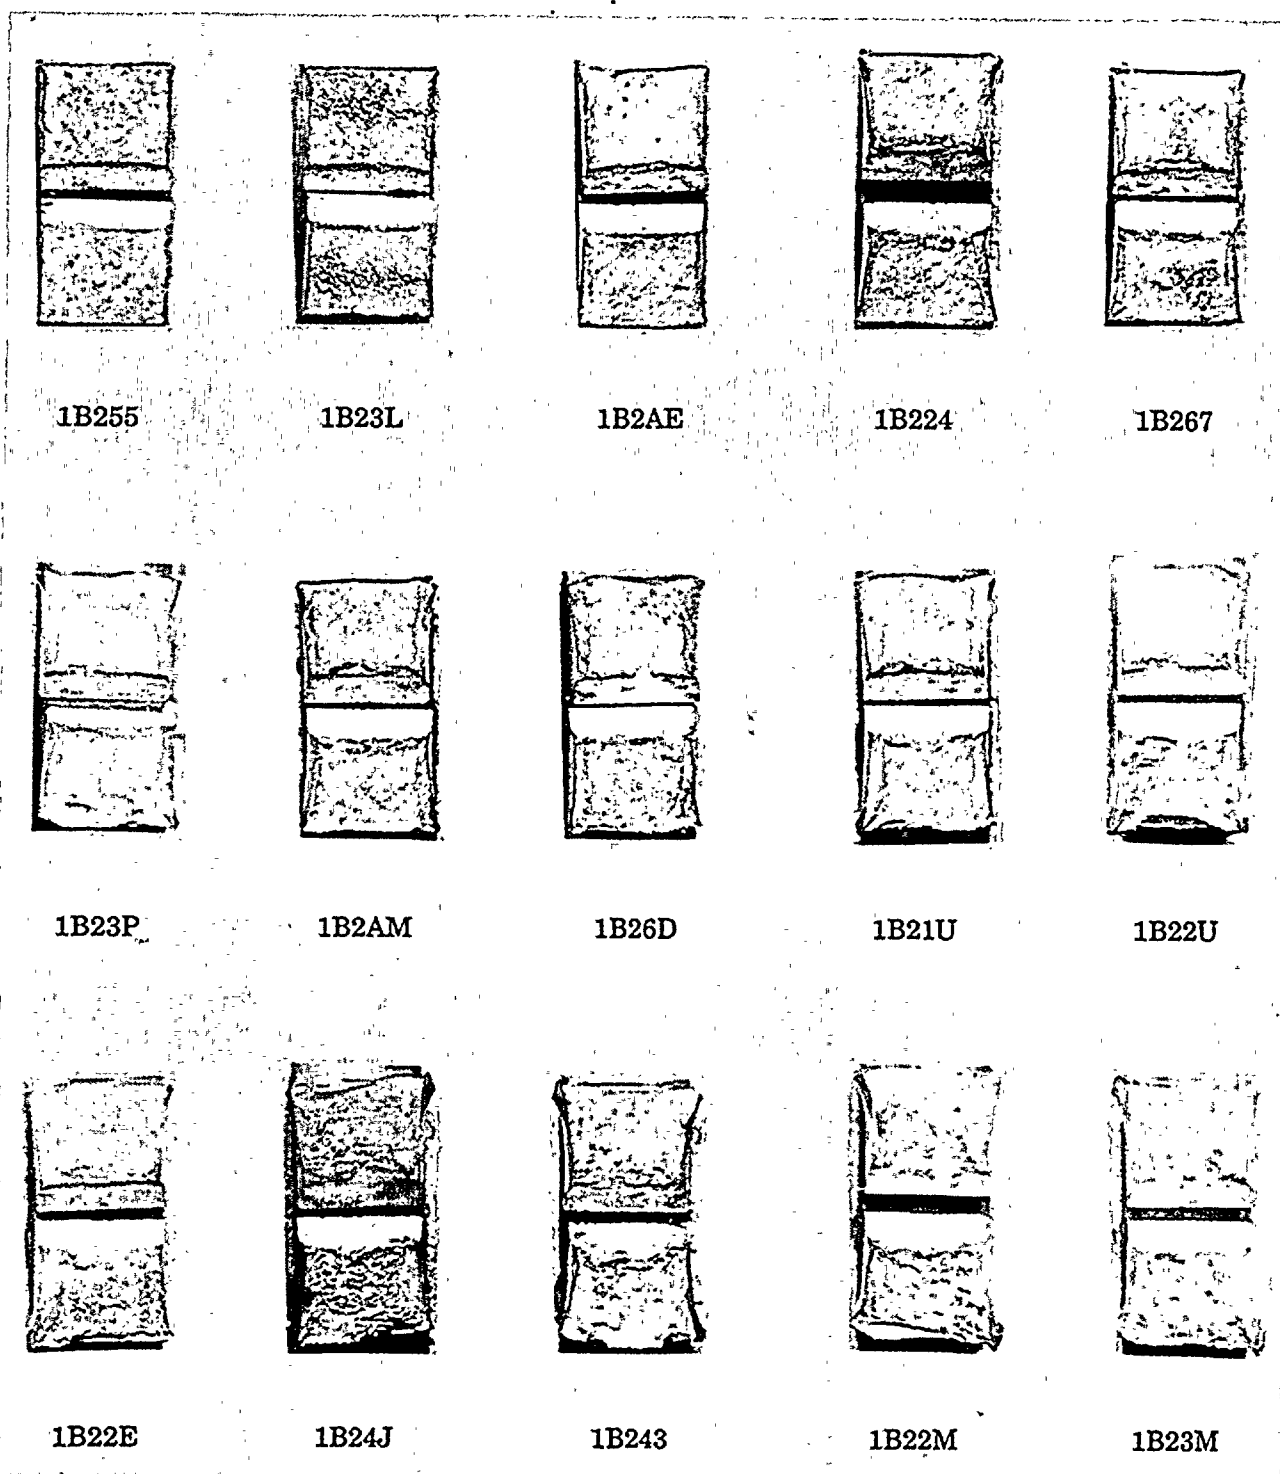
Charpy Impact Specimen Fracture Surfaces for Palo Verde Unit 2 Reactor Vessel Lower Shell Plate F-773-1 (Transverse Orientation)
